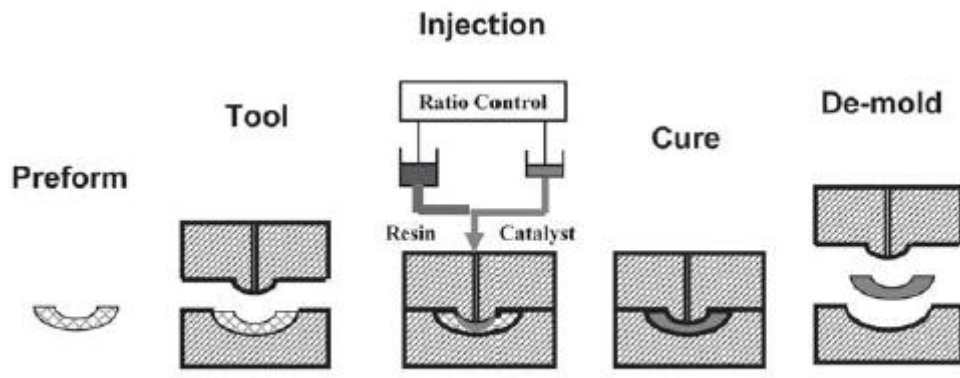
Schematic of the Resin Transfer Molding Process [36]
